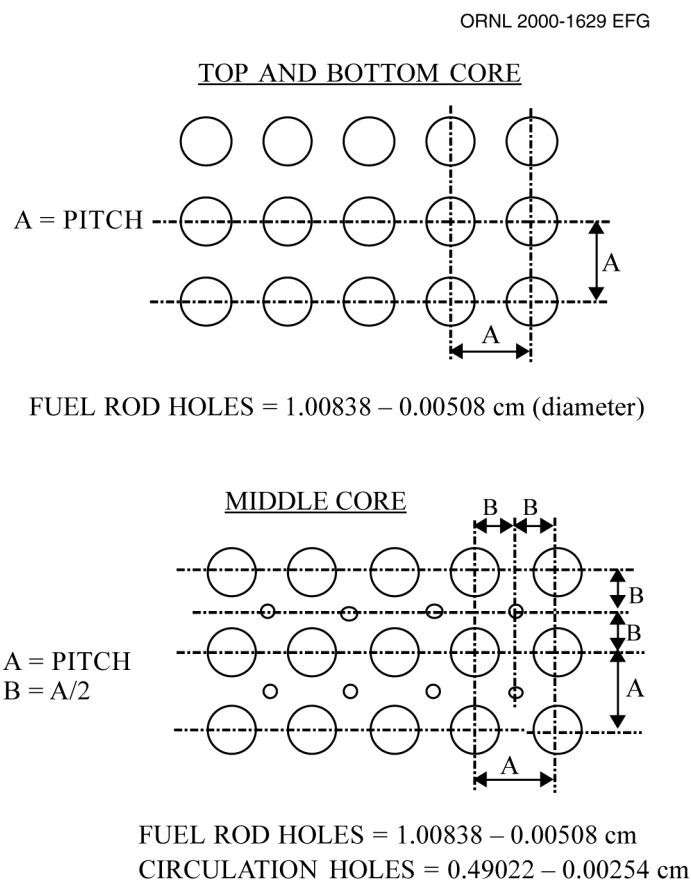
Layout of the holes in the top, bottom, and middle guiding plates.
